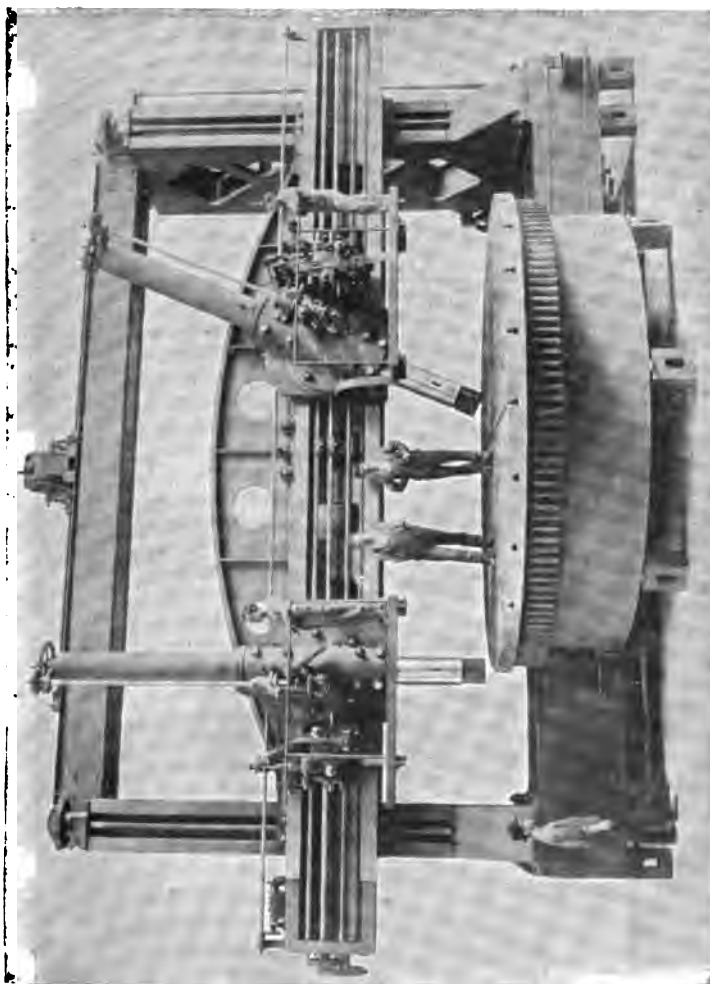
Where a belt drive manifestly would be out of place. Auxiliary movements secured through small motors in addition to the motor for the main drive.
